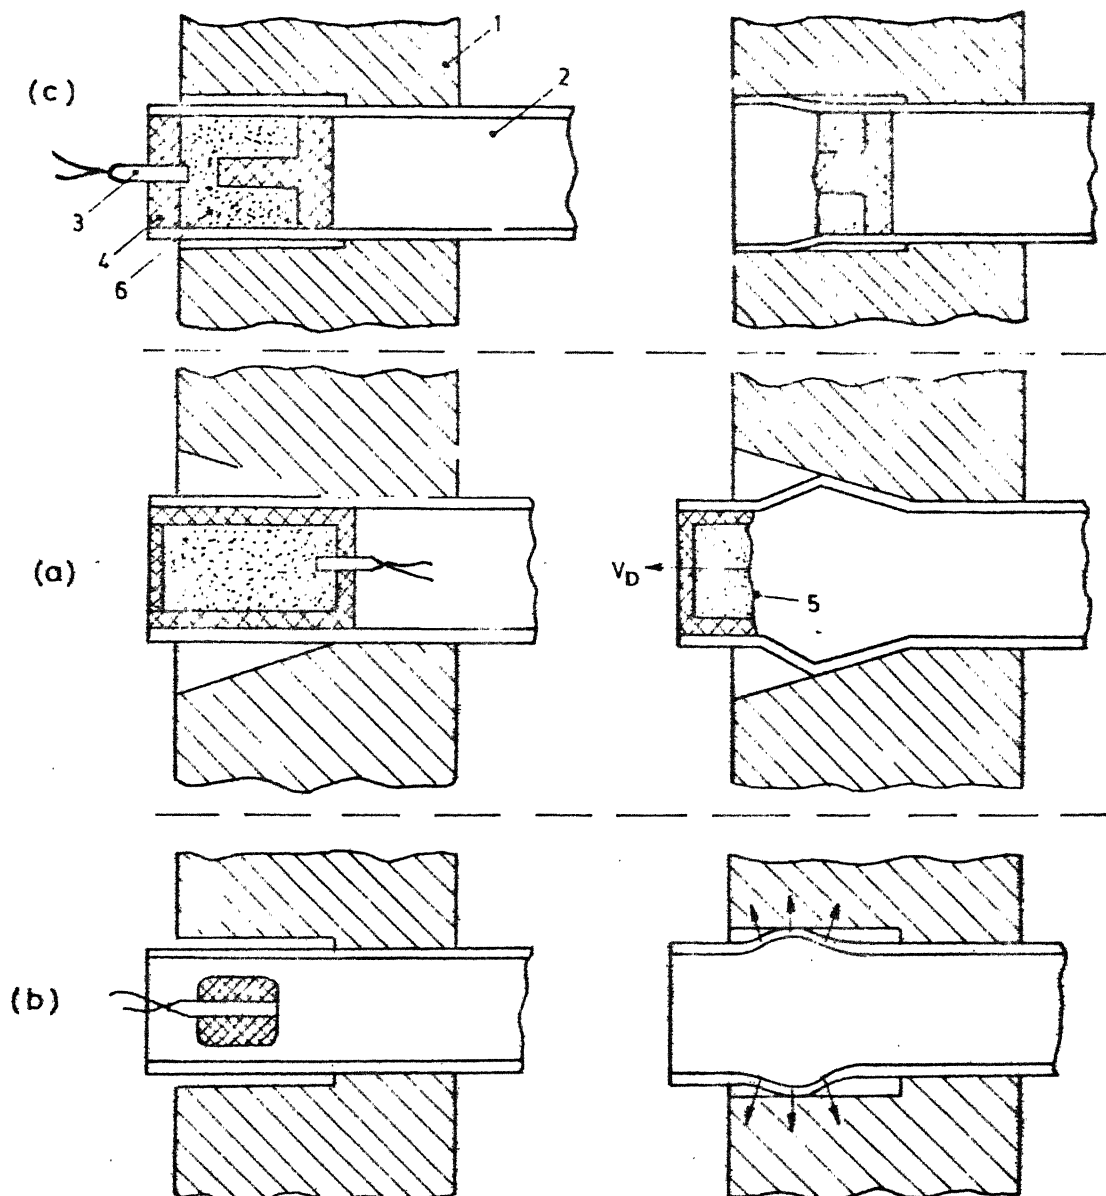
COMMON CONFIGURATIONS FOR EXPLOSIVE TUBE TO TUBE PLATE WELDING. (a) Parallel arrangement (b) Inclined arrangement (c) Point charge system with spherical expansion
